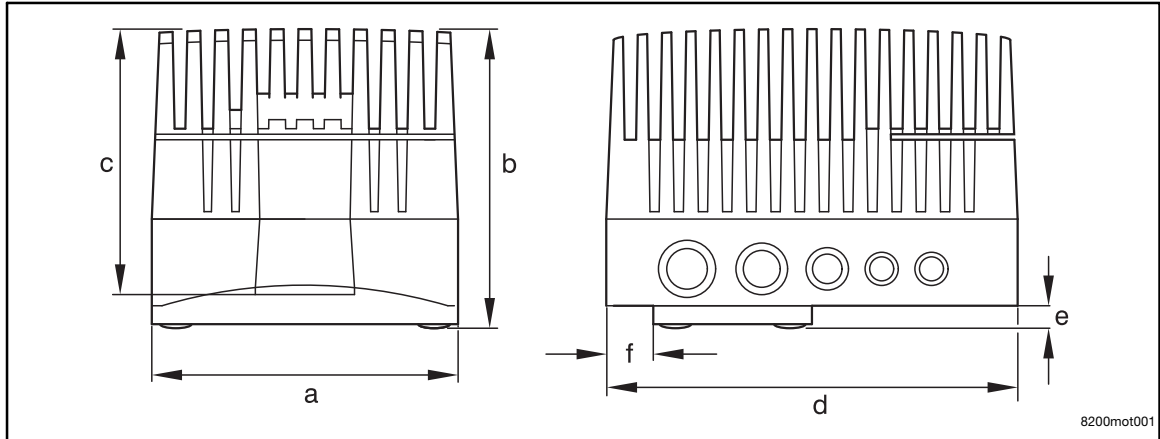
Dimensions 0.25 ... 2.2 kW
